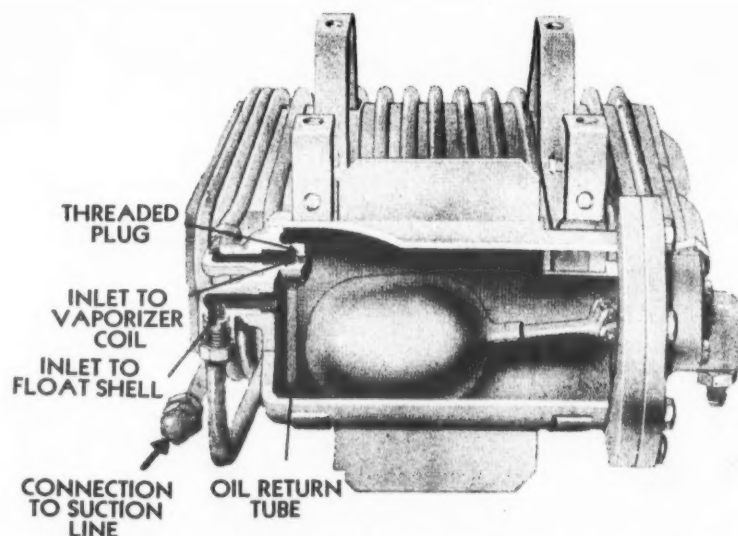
Shell and liquid return device, showing inlet to vaporizer coil.
